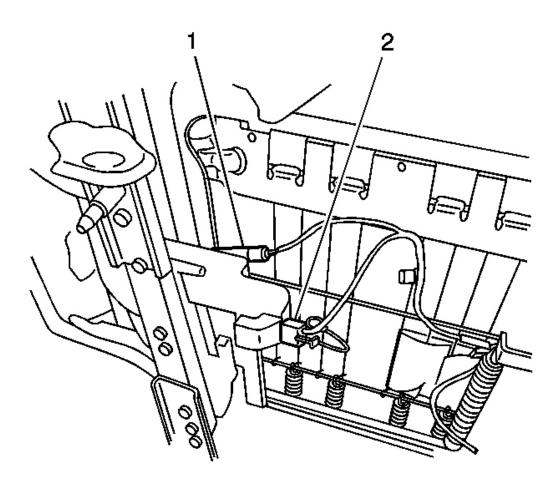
View Of Seat Buckle Electrical Connector & Wiring Harness Courtesy of GENERAL MOTORS CORP.
